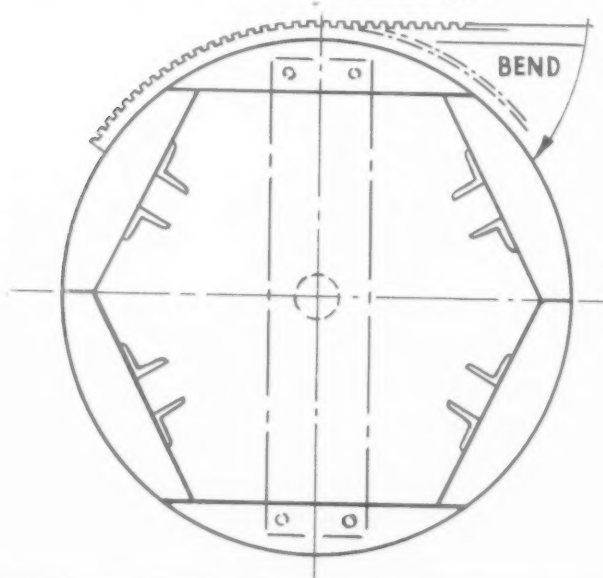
, at right. An alternate fixture, to be used in case V-joints should be at sides instead of at bottom.
